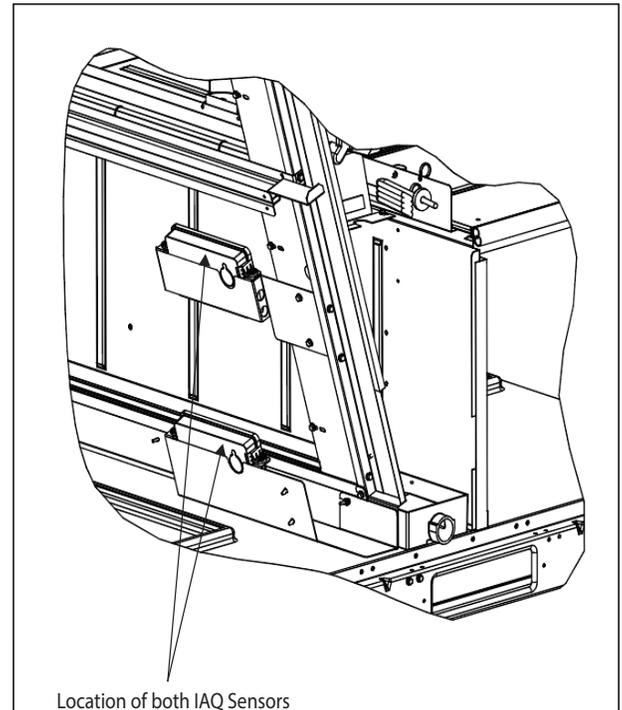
A-Box Wireless Sensor Locations (shown without filter)
